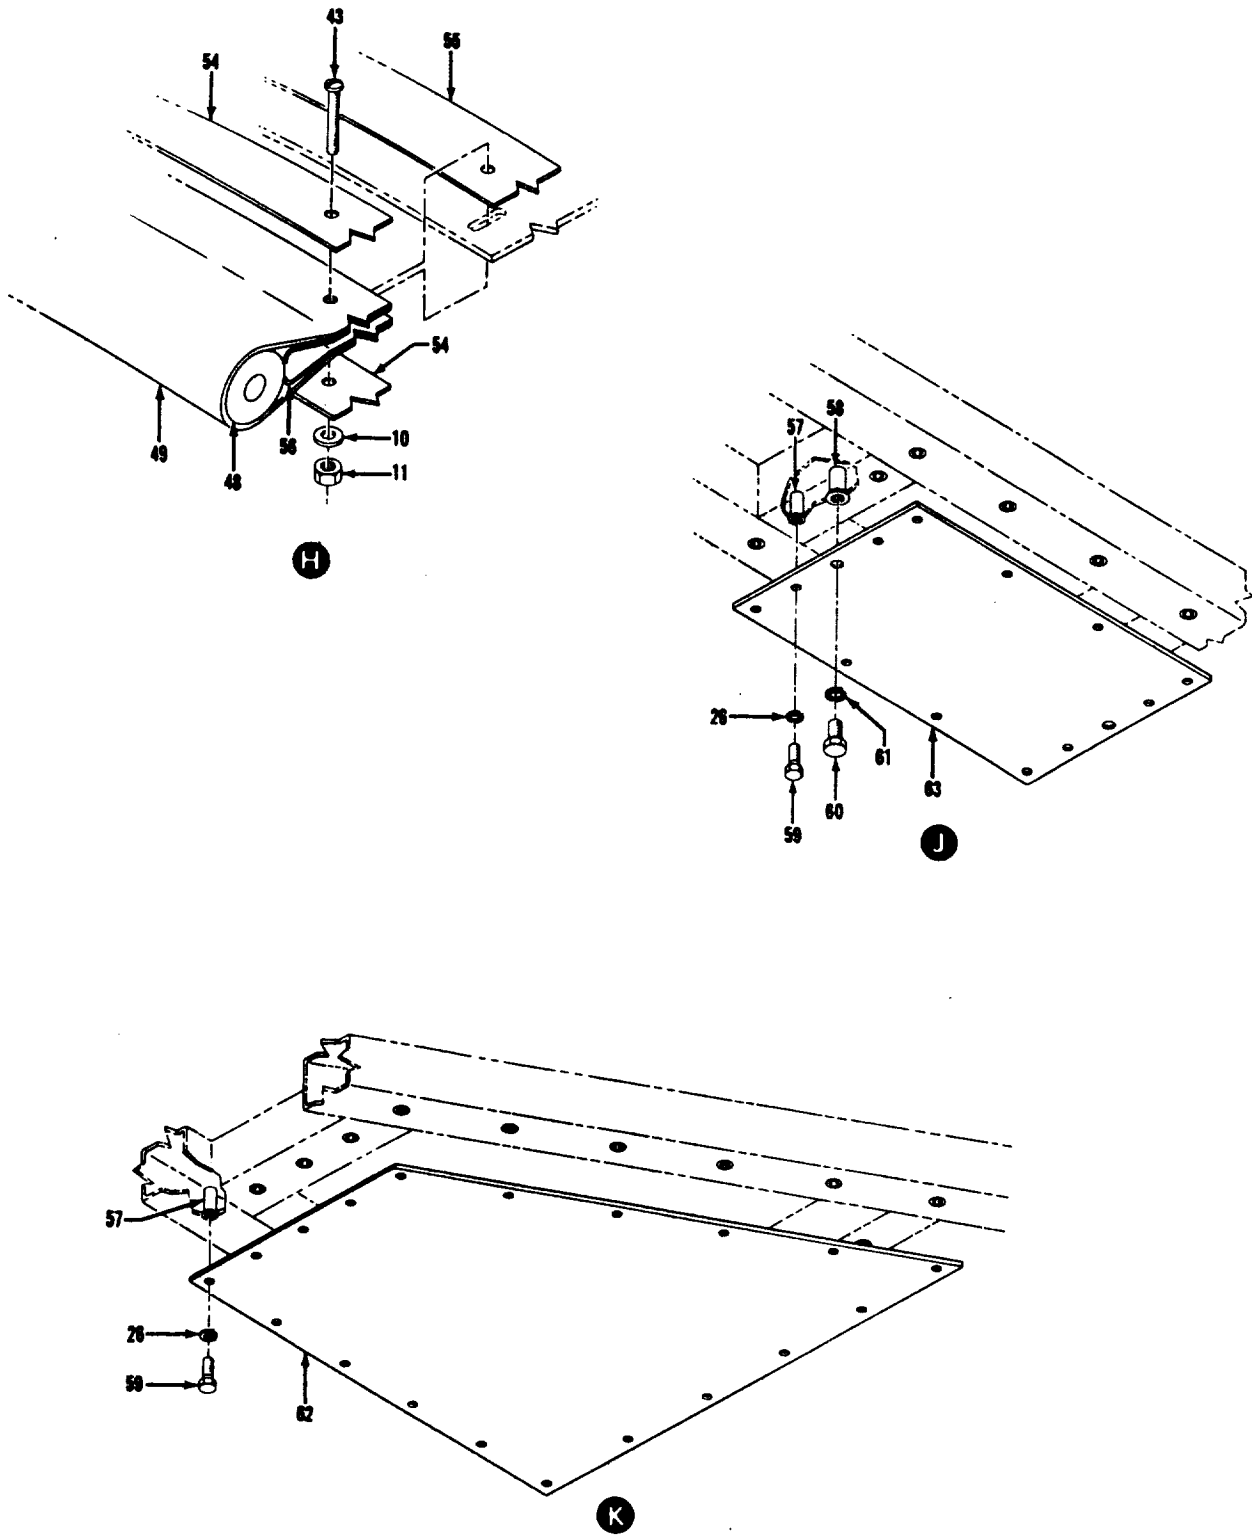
Hood Adapter Assembly (Sheet 4 of 6)
